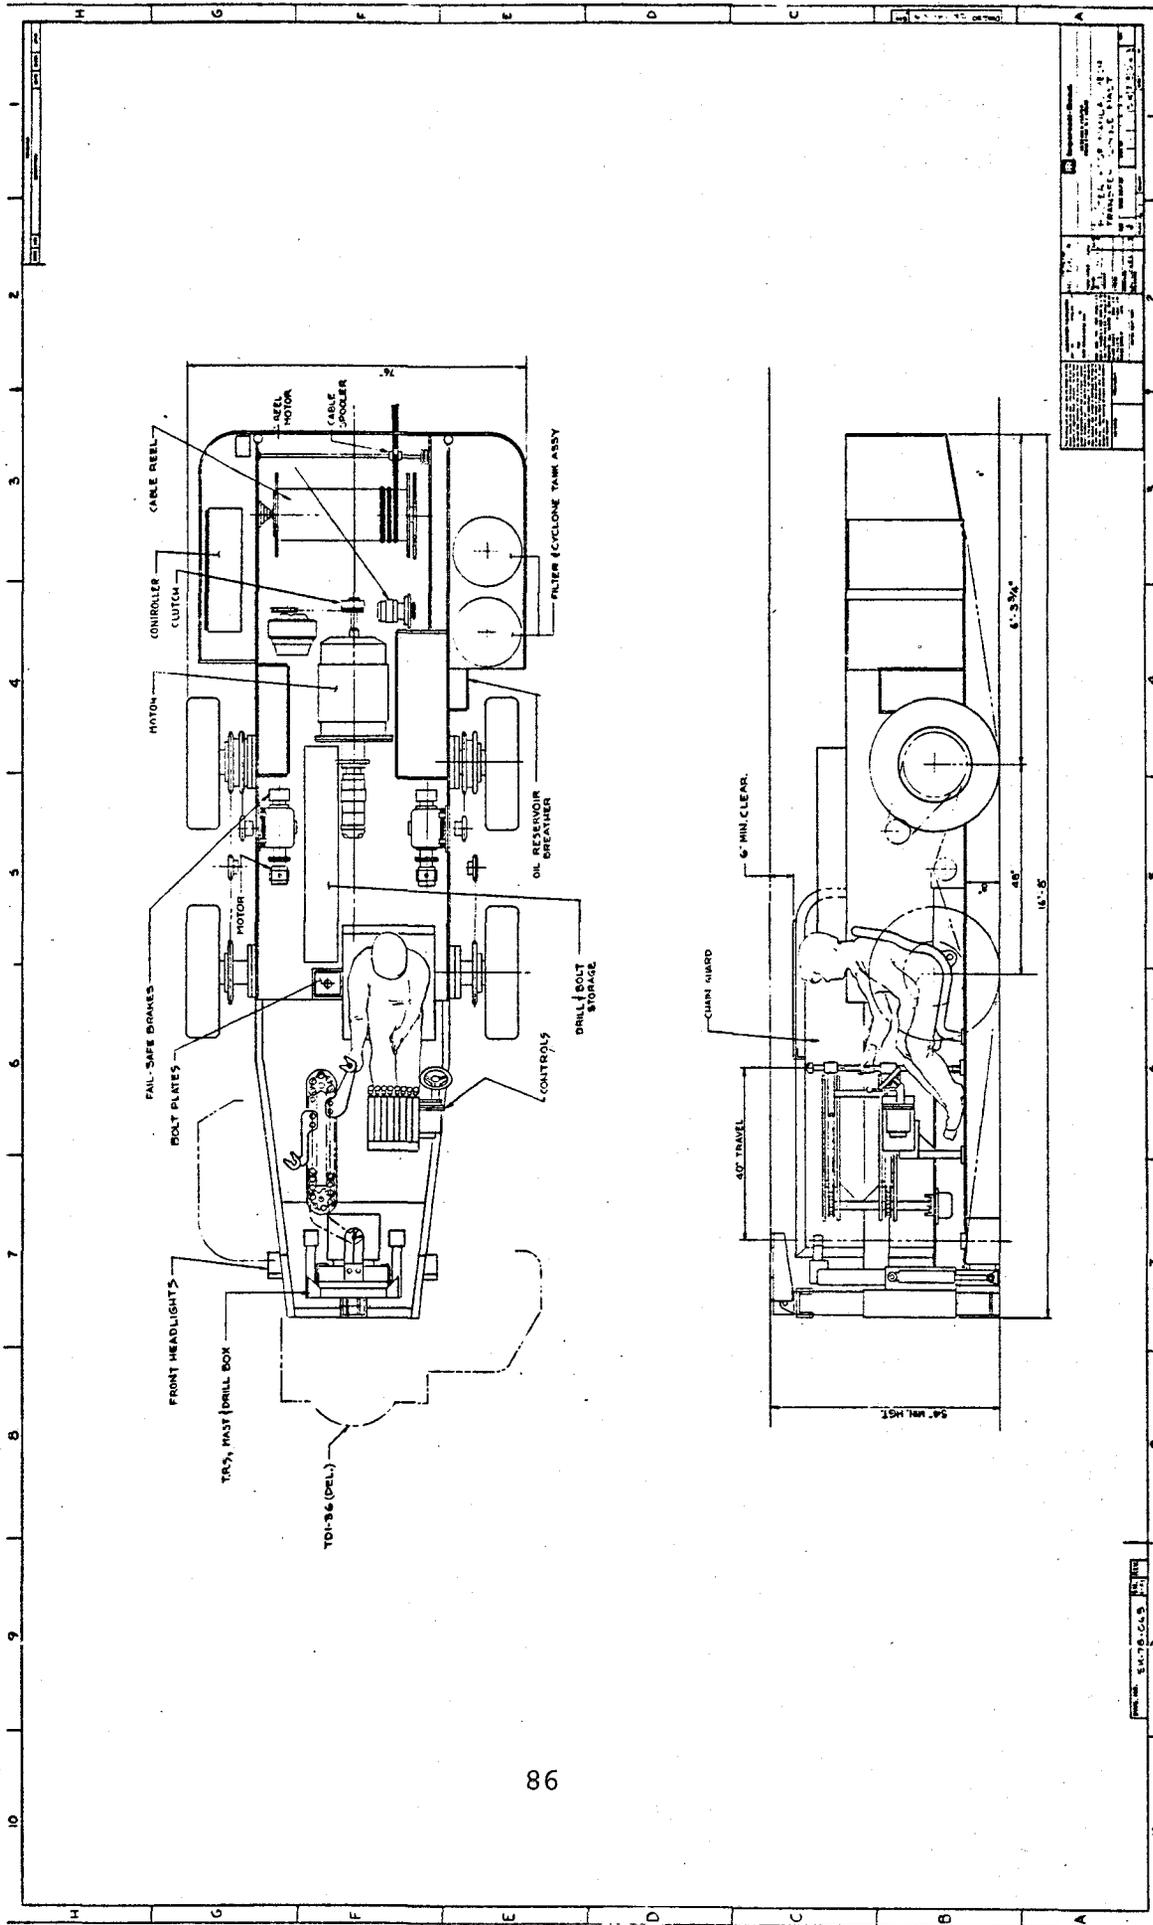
Plan and Elevation Views of the Transfer Bolter - Single Boom (Standard Chassis)
